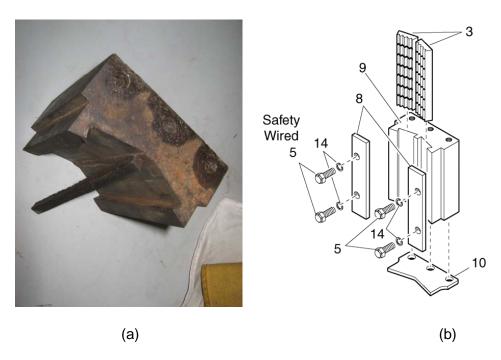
(a) Photo of failed component, (b) Die holder assembly
